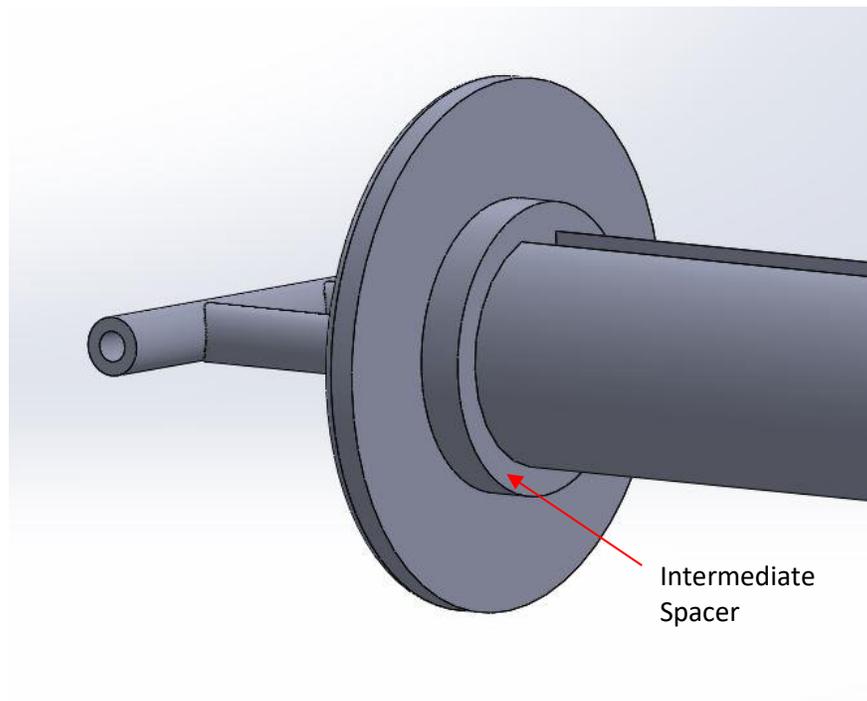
Final Drive End Design, Retractable Shaft Assembly, Handle End
